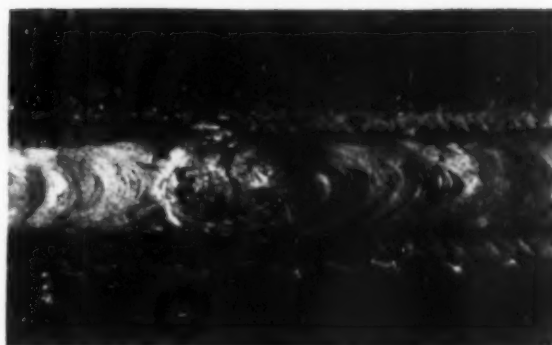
Typical Crater Crack in a 25-20 Deposit
